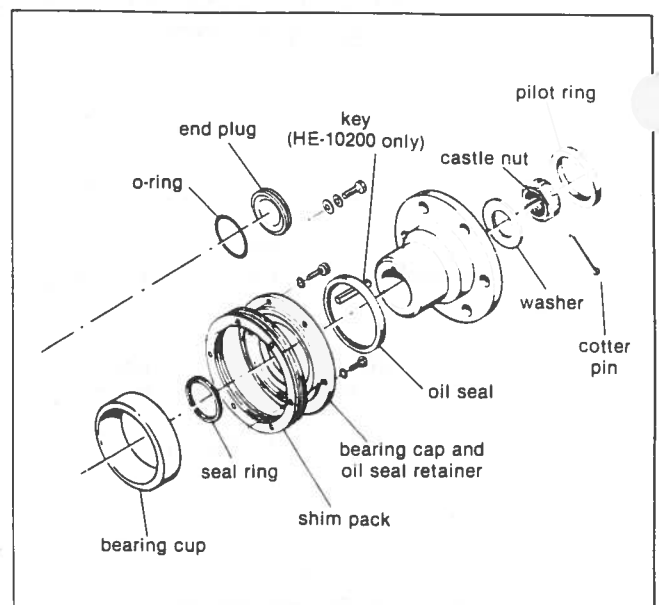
Output Coupling, Idler End Plug, and Related Parts.
